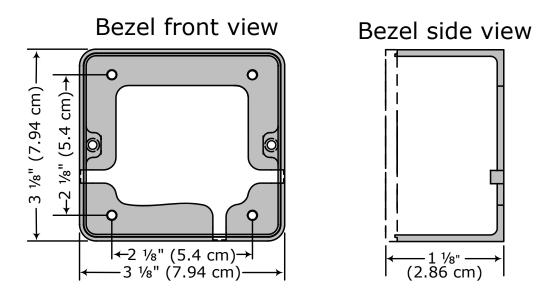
, Bezel Dimensions for Surface Mounted Remote
